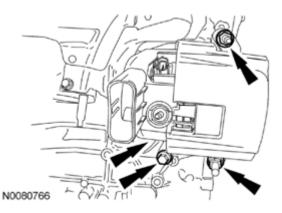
Locating Generator With Nuts And Bolts Courtesy of FORD MOTOR CO.
